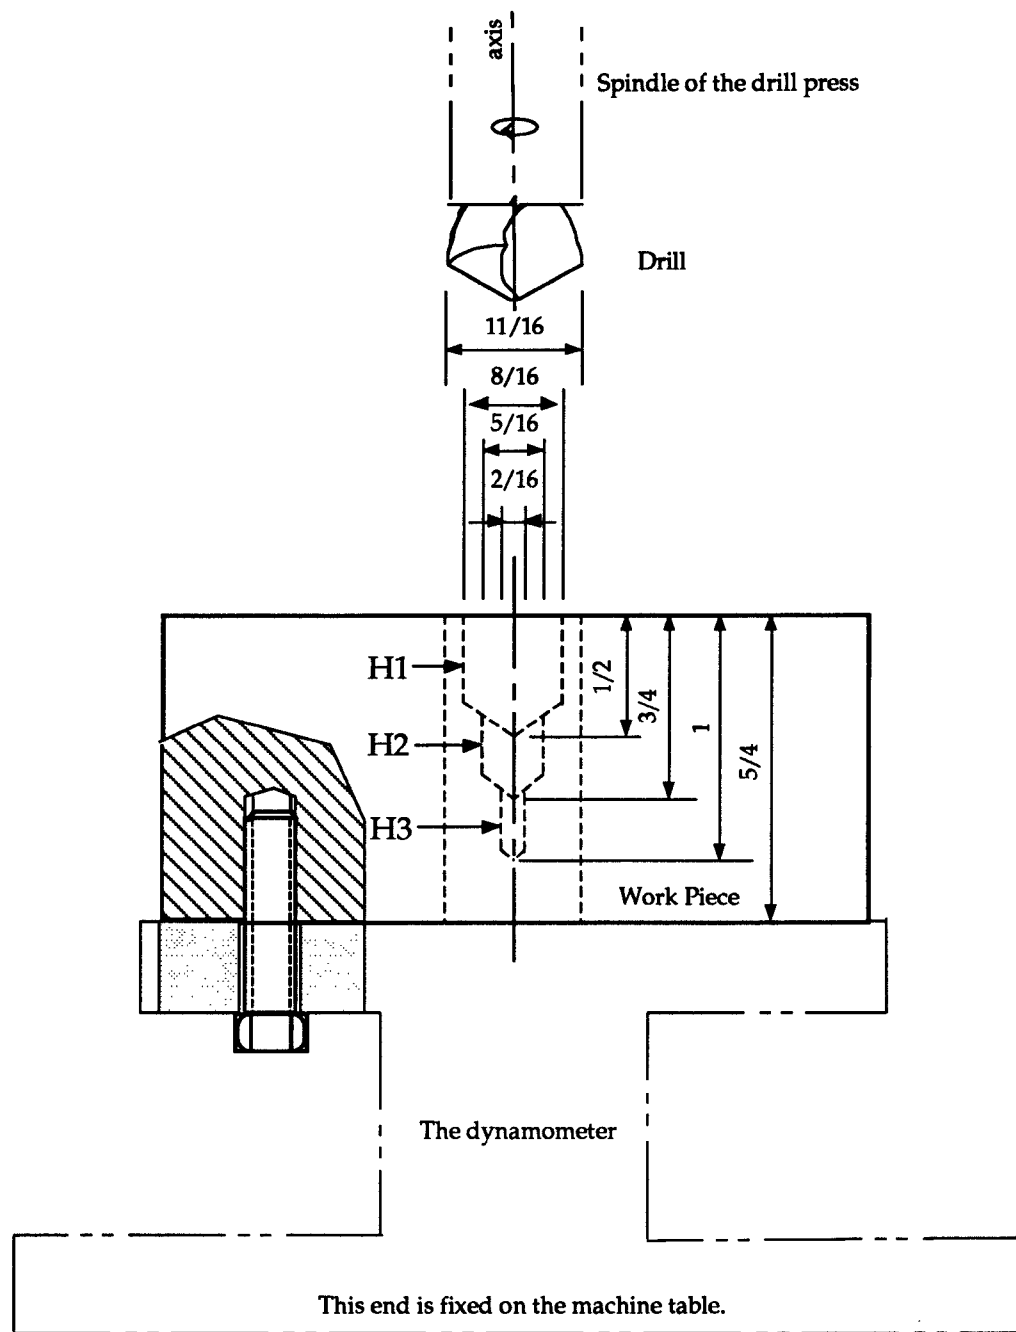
Workpiece specimen with three holes for drilling experiments.
